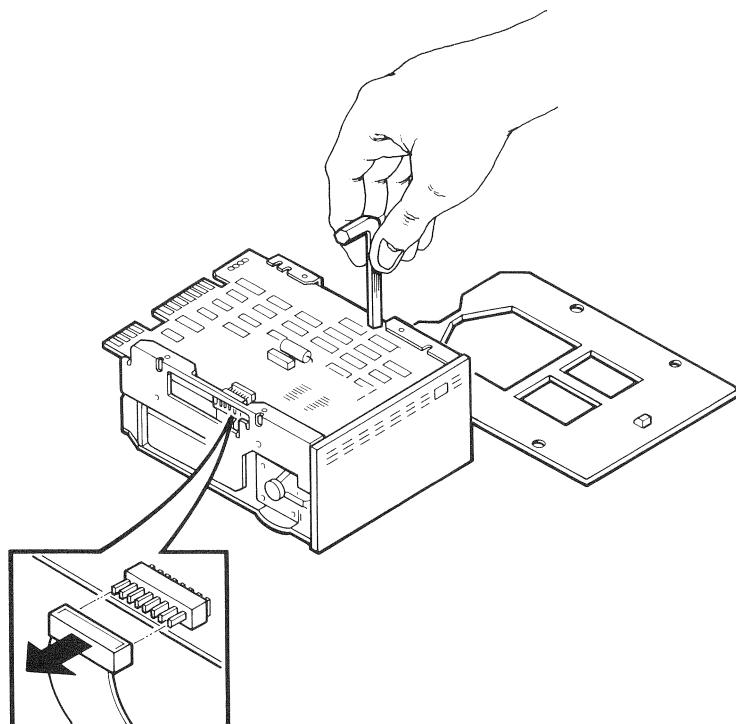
RD51 Disk Drive Allen Screws and Connector P5 Removal
